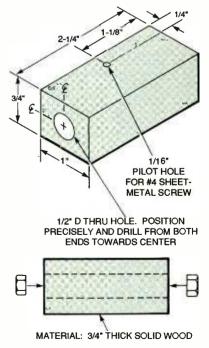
The drill driver, like the table driver (Fig. 8), has a ¹/₂-inch throughhole.
